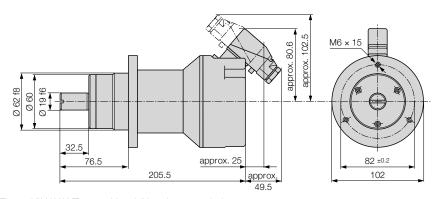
KINAX WT 707 with additional gear and plug connector.
